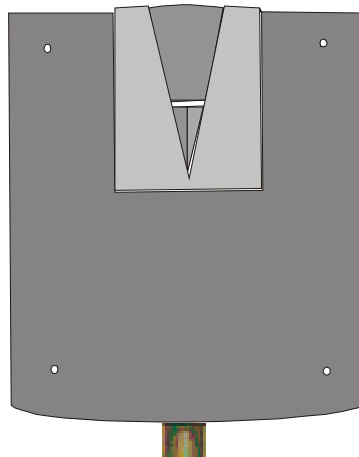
4220 Case Front, Showing Four Mounting Holes
